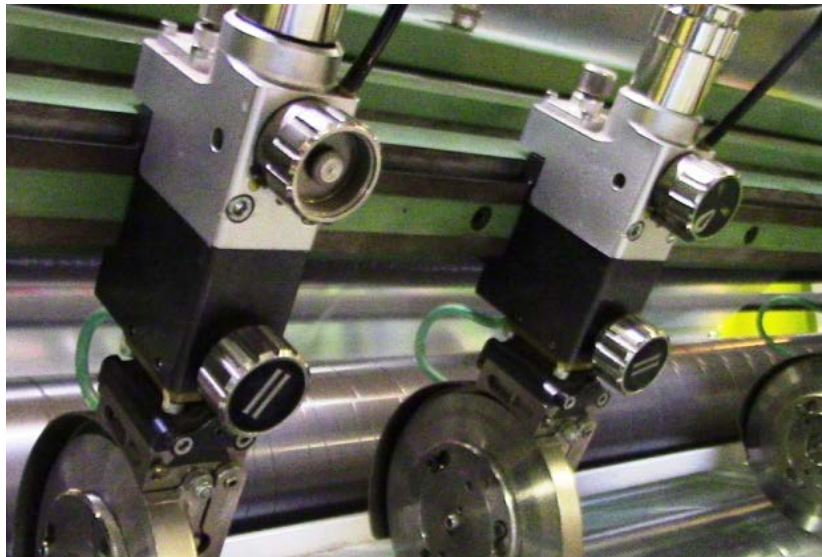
Front view of male slit blade assembly with pneumatic tubing [2]
